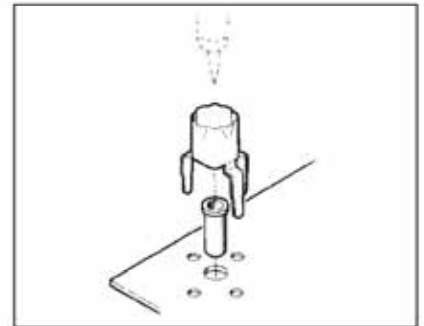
Typical ECB to Probe Tip Adaptor installation
